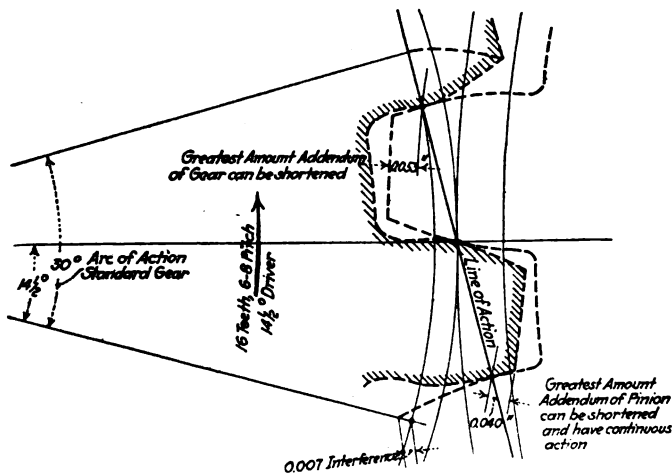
PRELIMINARY LAYOUT THAT IS MADE TO DETERMINE THE LENGTH OF TOOTH NECESSARY TO GIVE A COMPLETE ARC OF CONTACT
